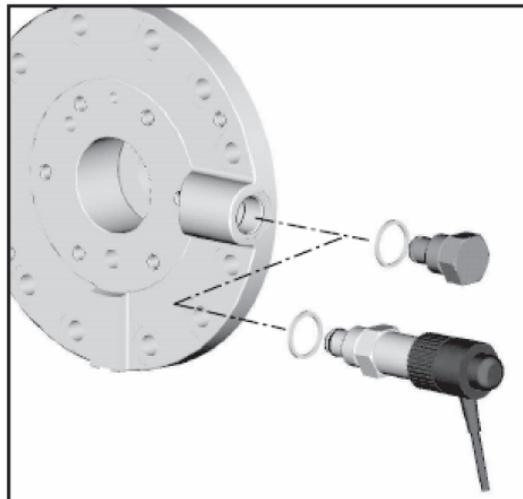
Installation diagram of the electronic oil pressure difference switch
